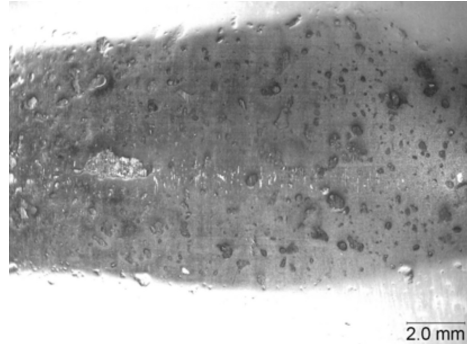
Embedded wear debris particles on the wind turbine gearbox bearing roller surface [38].
